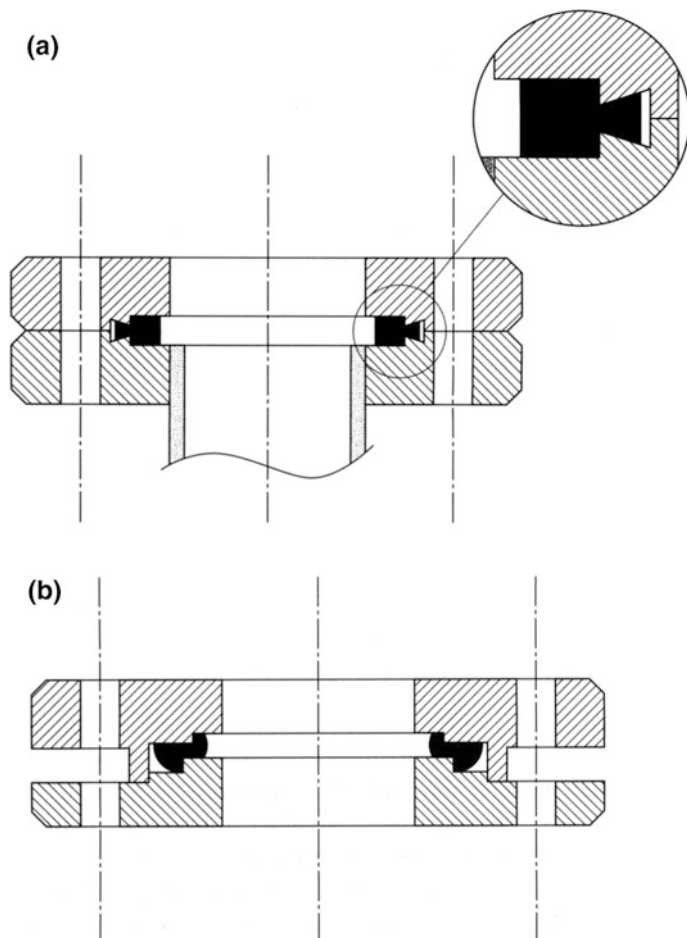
Gasket designs. a Conflat flange + Cu gasket. b Gold wire—shear seal
